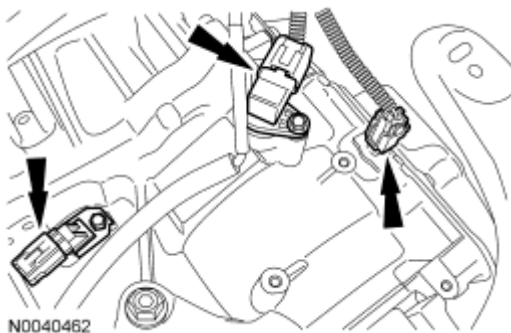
Locating Turbine Shaft Speed (TSS) Sensor, Intermediate Shaft Speed Sensor And 5Th Gear Valve Body Electrical Connector
